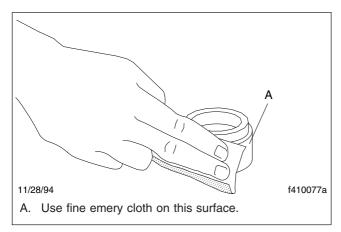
, Smoothing a Half-Round Yoke U-Joint Bearing Cup
